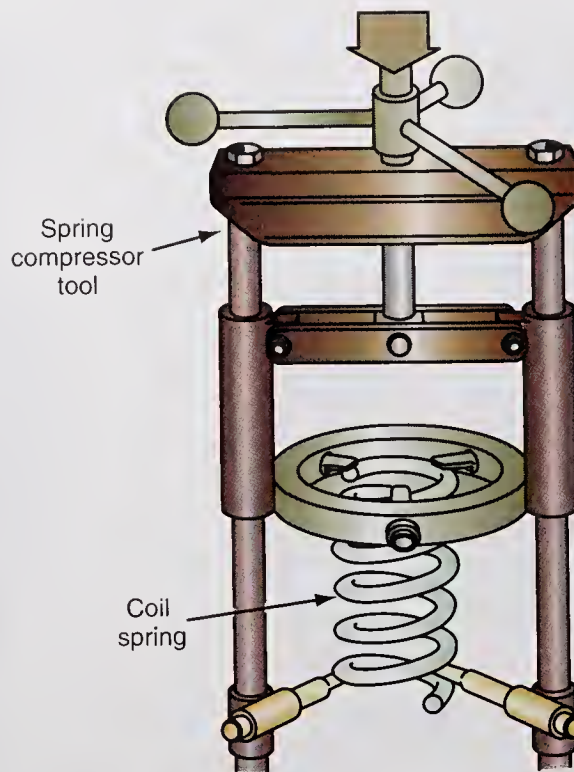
Compressing the coil spring in the compressing tool prior to strut-and-spring assembly.
